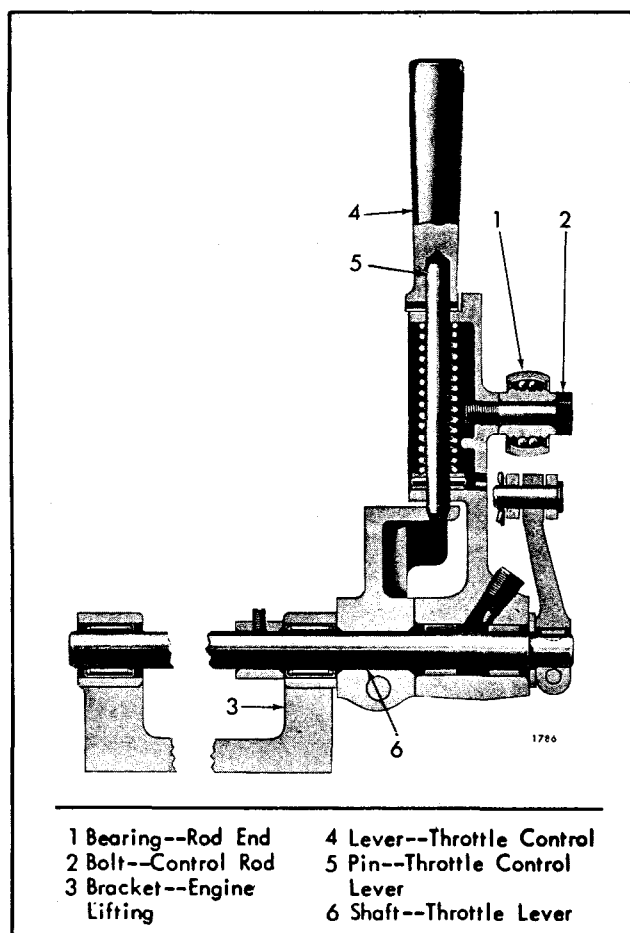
Individual Throttle Assembly on a Tandem Twin Unit
